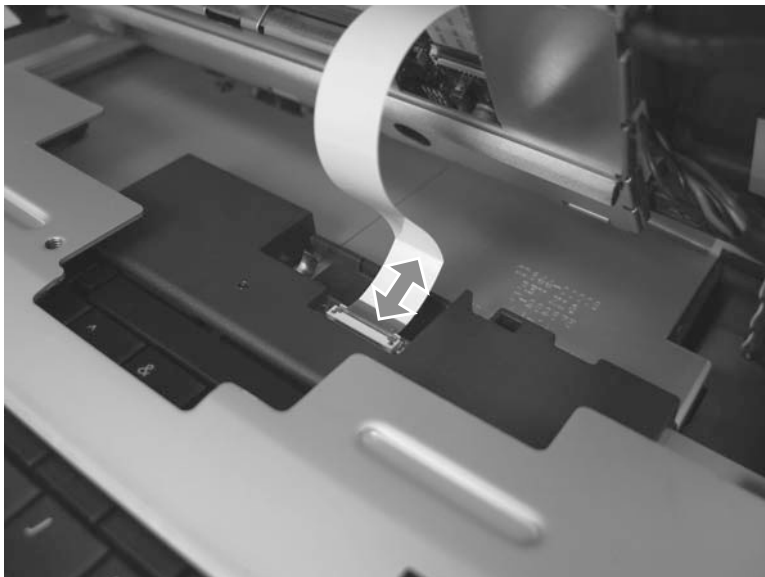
Reinstall the control-panel assembly (4 of 13)
